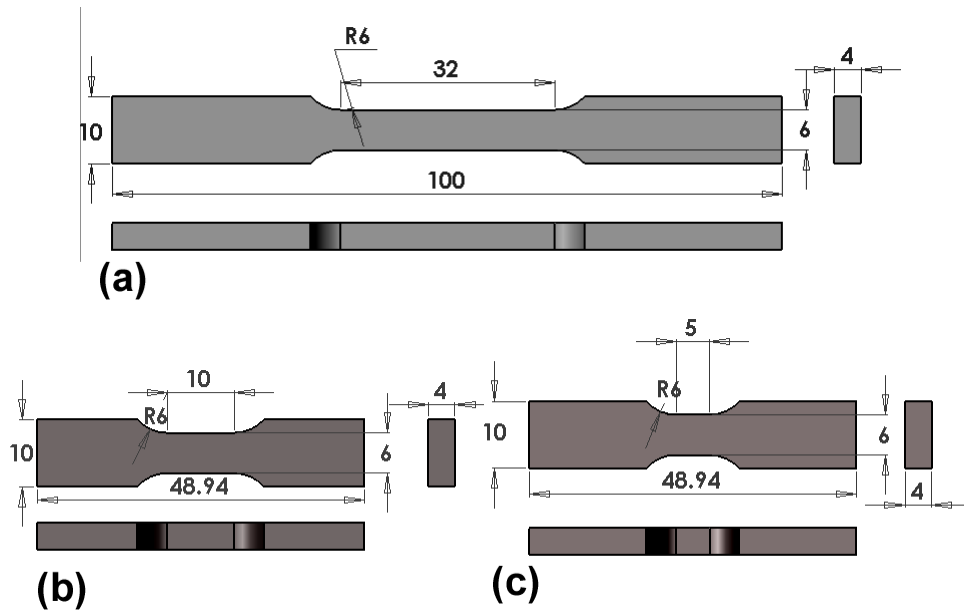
Specimen geometries for FEM. (a) ASTM E-8M specimen, (b) 10 mm gage length specimen, (c) 5 mm gage length specimen. All dimensions are mm. (Courtesy of K. Yazzie)
